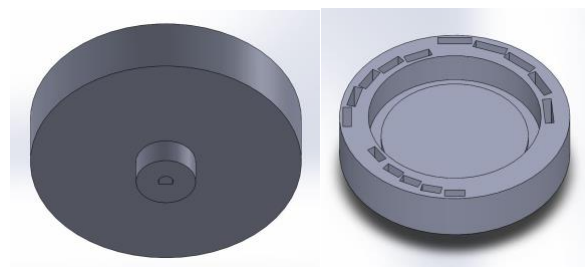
Motor Mount 3D printed part. This piece attaches to the motor shaft. The curvilinear rectangular holes are to test different radial distance and magnet size.
